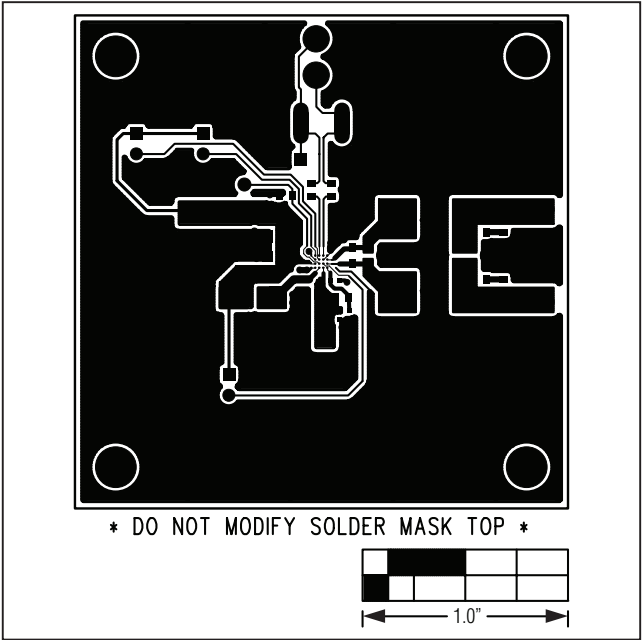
MAX98500 EV Kit PCB Layout—Component Side
